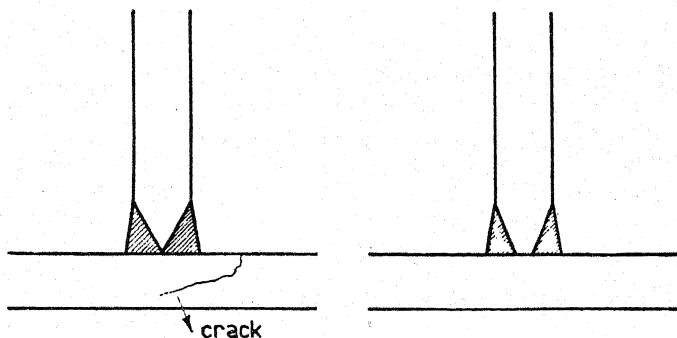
Incomplete K-weld to relieve stiffness.
